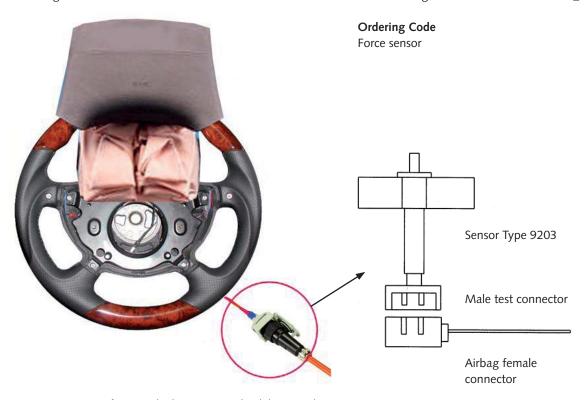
Measuring forces involved in inserting and withdrawing airbag connectors with a male test connector, which transmits the forces directly to the sensor Type 9203.
